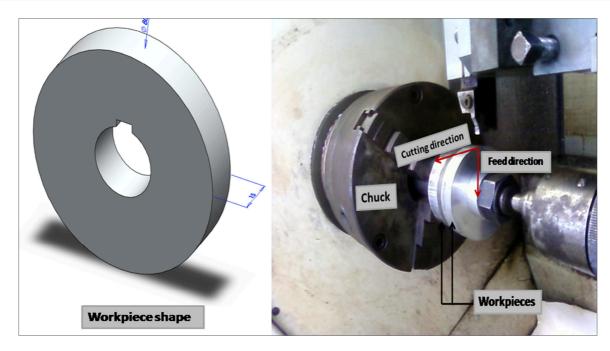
Experimental setup used for orthogonal turning and cutting force measurement
